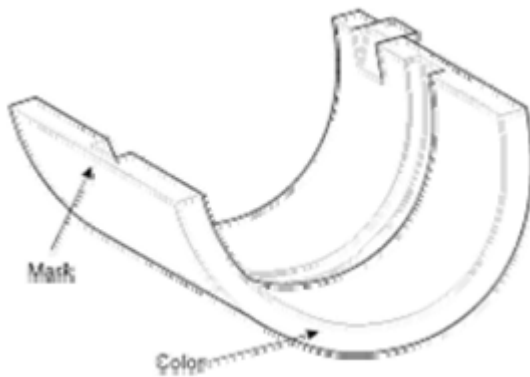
Identifying Identification Mark Of Crankshaft Bearing
